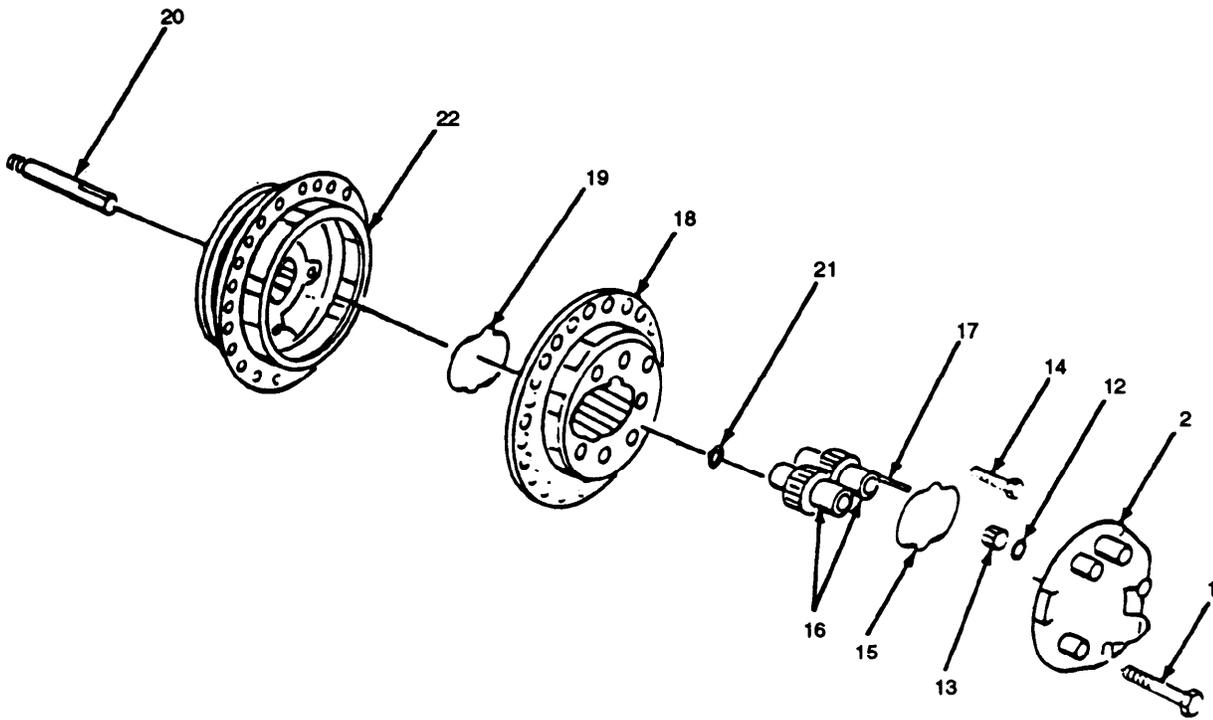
Winch Motor, Reassembly (Sheet 2 of 2).
